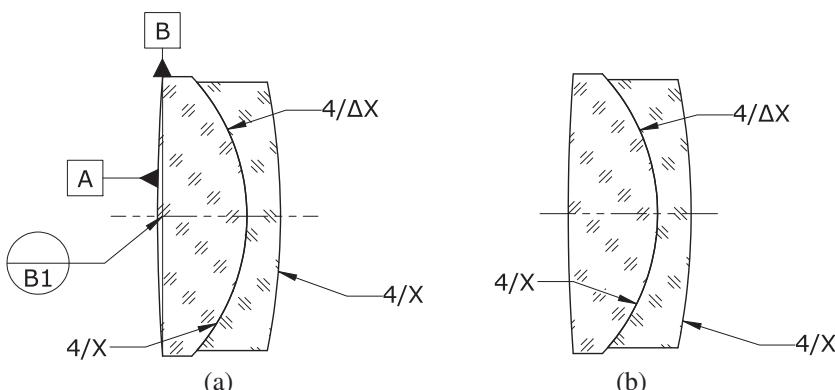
Centering tolerance for the first optical element, the cemented surface between the two optical elements and the right surface on the second optical element. This centering tolerance description is shown both (a) explicitly and (b) implicitly.
